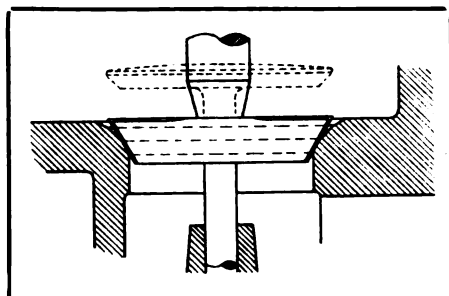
Cutter With 60-Degree Angle Cuts Away Metal Below Seat Proper.
